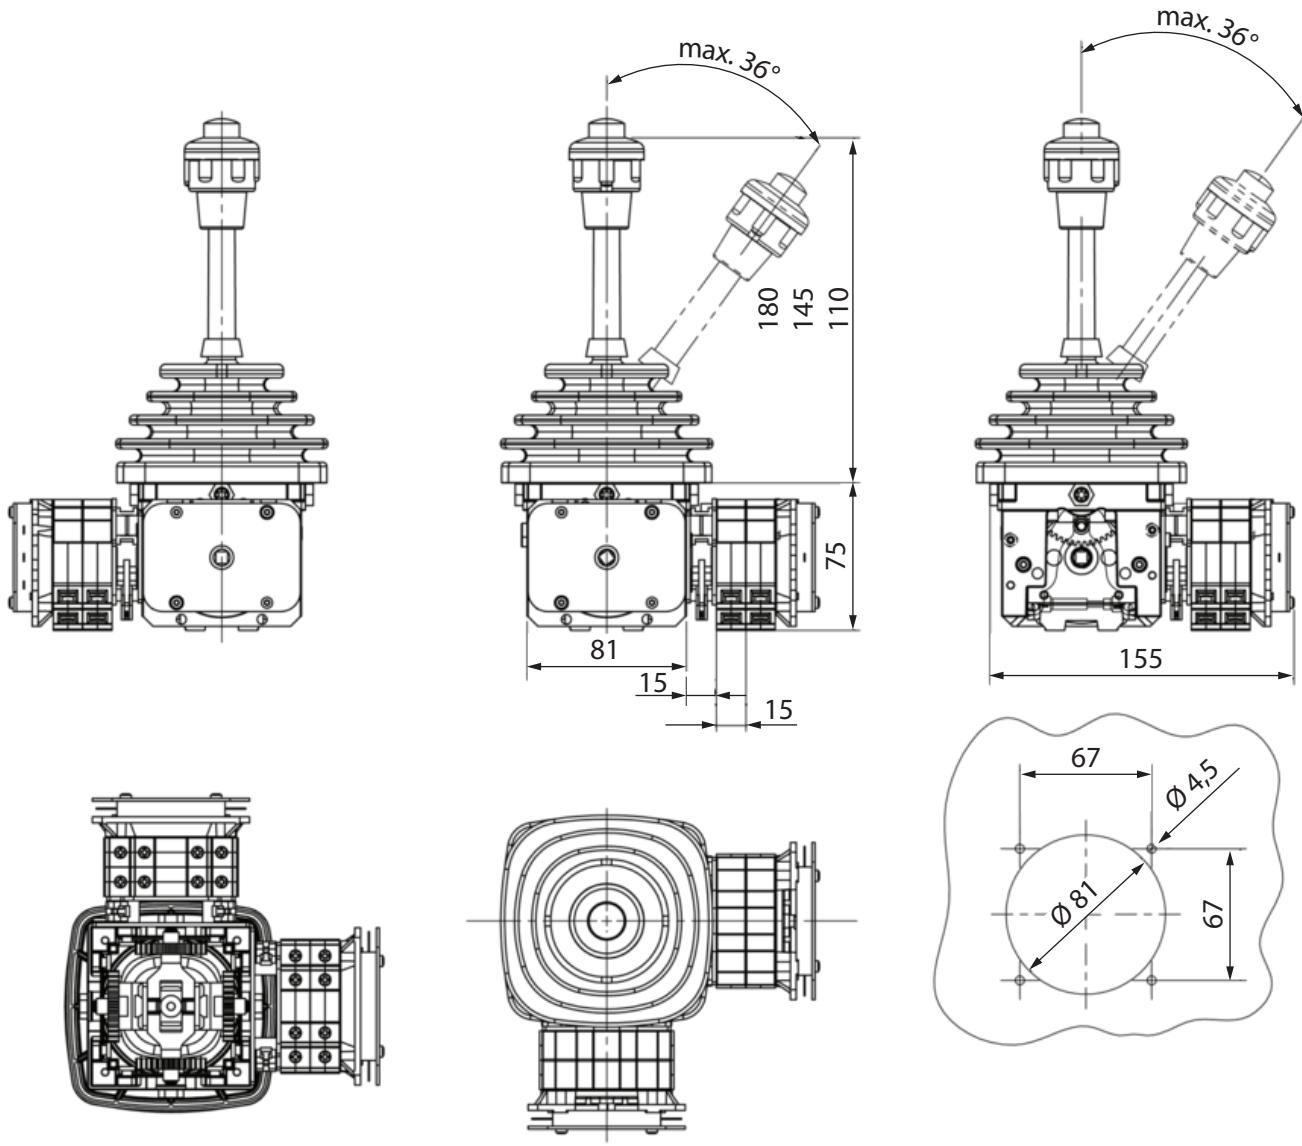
Joystick VNS0 – dimension drawing (dimensions in mm)
